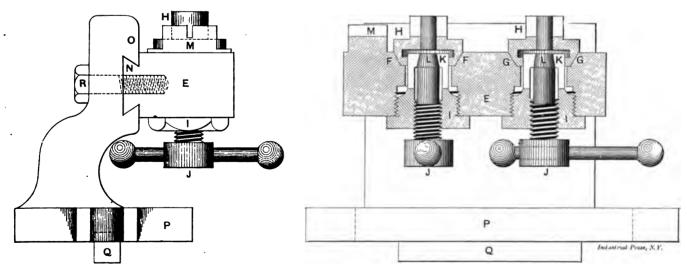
Fixture with Spring Clamp for Holding the Work shown in Fig. 2.
